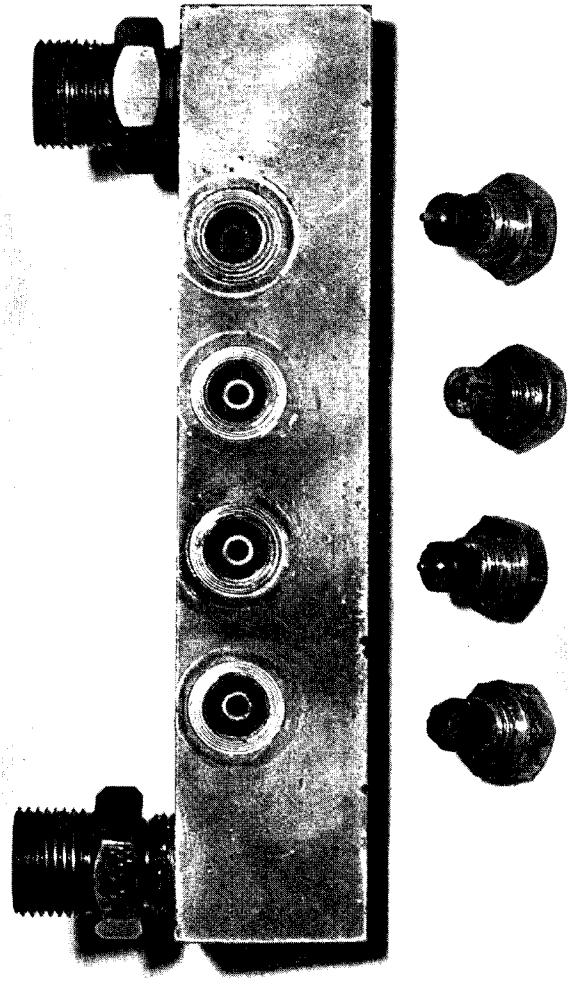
VIEW OF THE MANIFOLD AFTER TESTS DURING WHICH VALVE SEATS WERE DESTROYED
